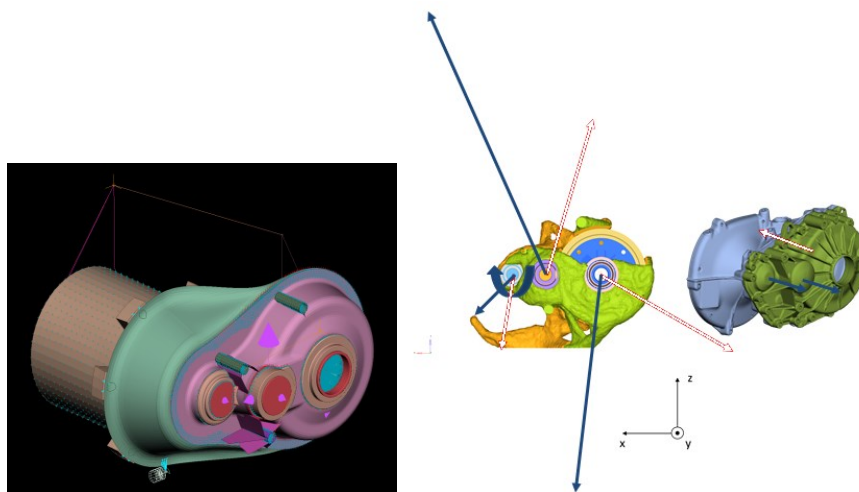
Left: Shell model of the gearbox (close to final design) with electric engine and fixation in the body. Model also includes internal parts like shafts and gears. Right: Qualitative radial and axial loads in the gearbox housing. Additionally a result of the topology optimization can be seen left hand.
